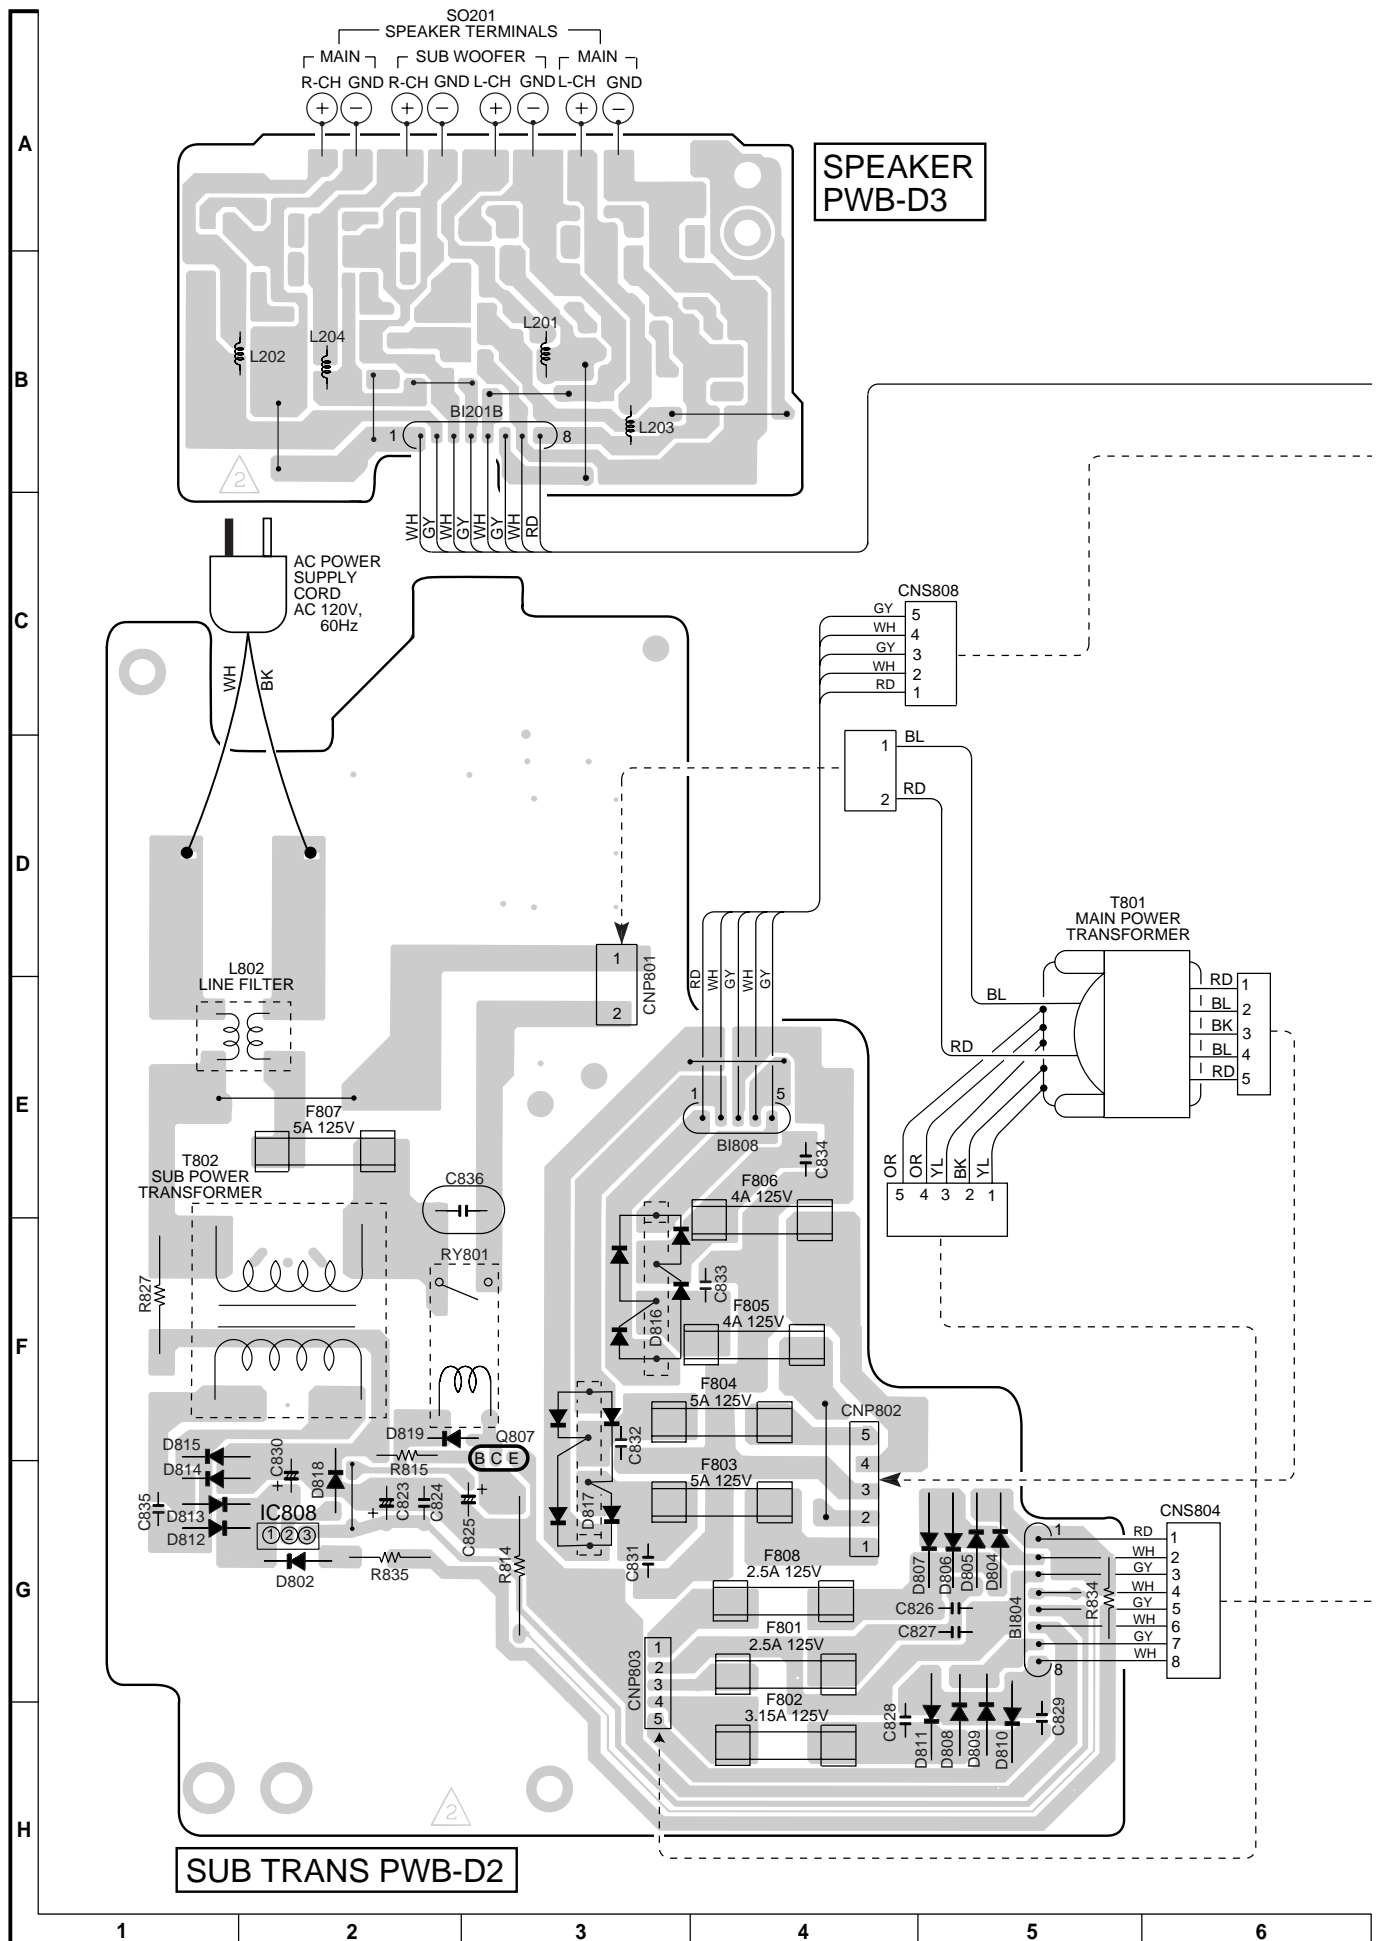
WIRING SIDE OF P.W.BOARD (8/9)
